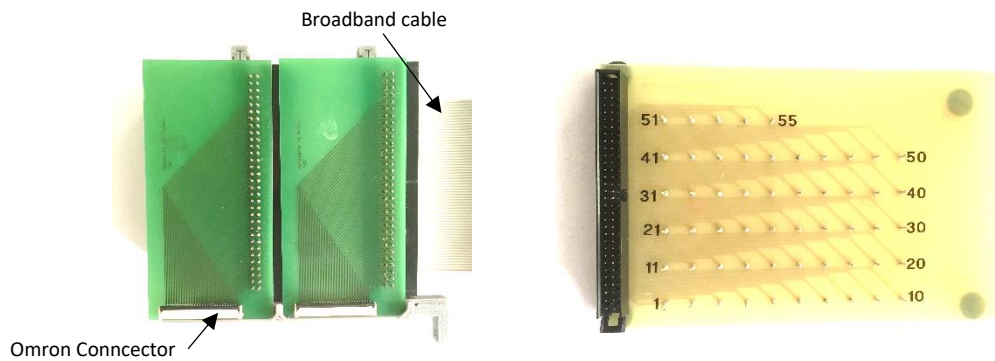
(left) PCB, translating the OMRON connector (bottom) to a standard broadband ribbon cable (right side) to contact the Flex MEA; (right) PCB to contact the broadband wire from the prior PCB
